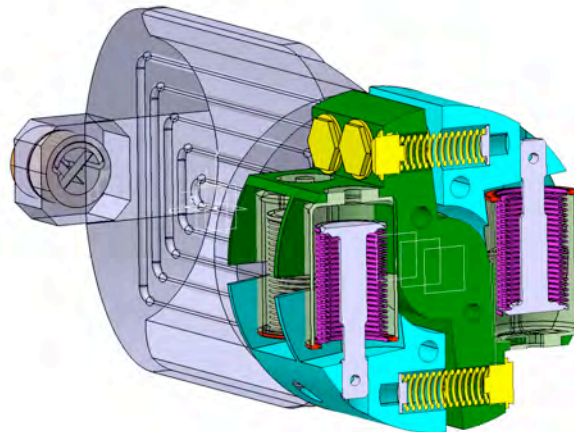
Exploded view of the conceptual steering mechanism design with the principle components identified.
